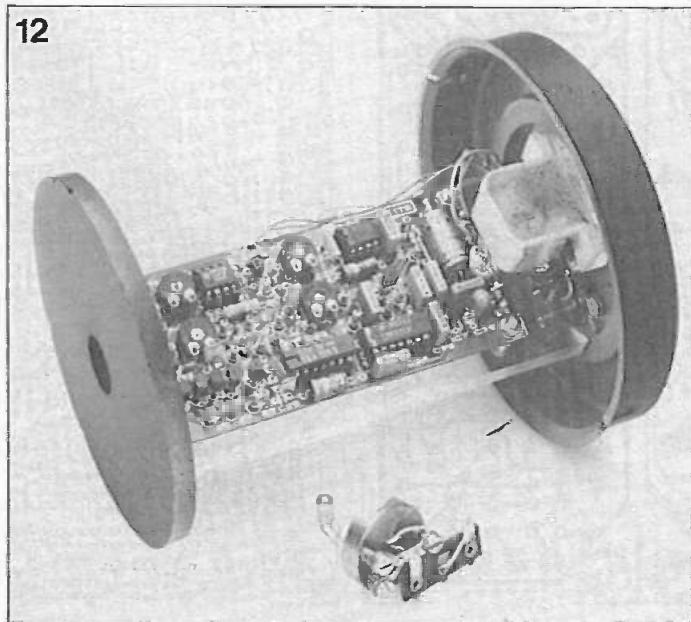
The positioning system for the IRED, and the receiver assembly ready for fitting into the tube.
